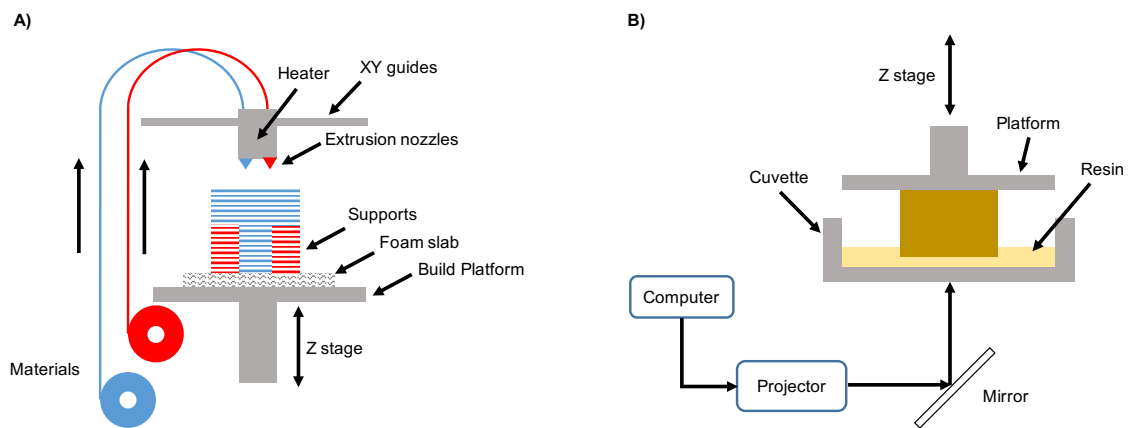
Scheme of different 3D printers used in this work. A) FDM printer and B) Stereolithography printer.
